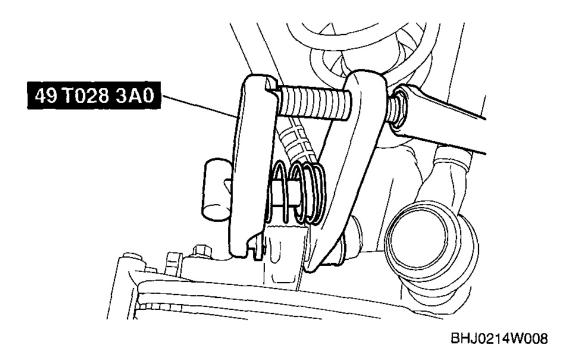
Disconnecting Rear Trailing Link (Upper) Ball Joint Using SST Courtesy of MAZDA MOTORS CORP.
